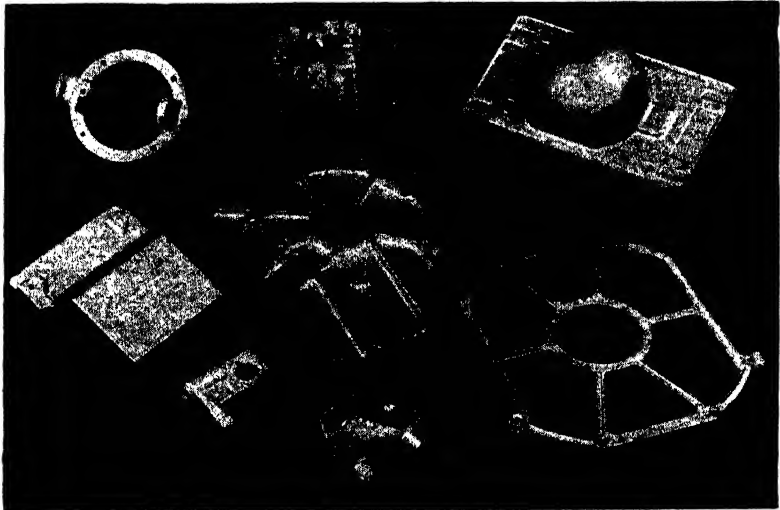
Group of die castings in aluminum alloy, fairly typical of many in general production. Some of them could be produced in permanent molds, but not with dimensional tolerances quite so close or with surfaces quite so smooth as those on the die castings. Some of those shown are produced in cold-chamber machines.
